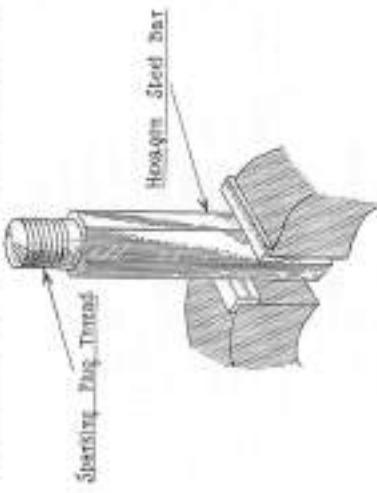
A USEFUL GADGET FOR HONING THE CYLINDER HEAD WHILE DECARBONIZING
